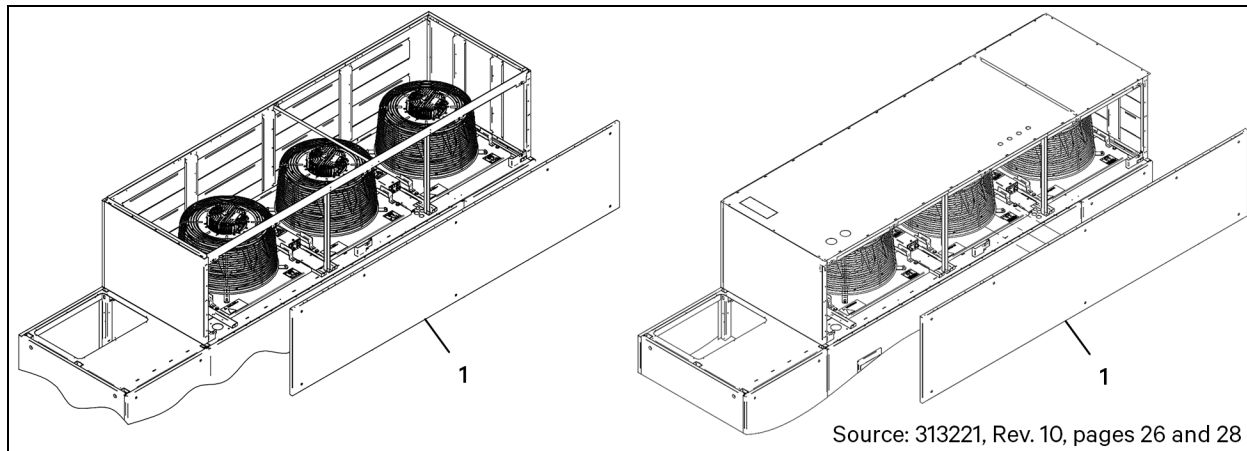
Rear Discharge Top Panel Assembly and Attachment
